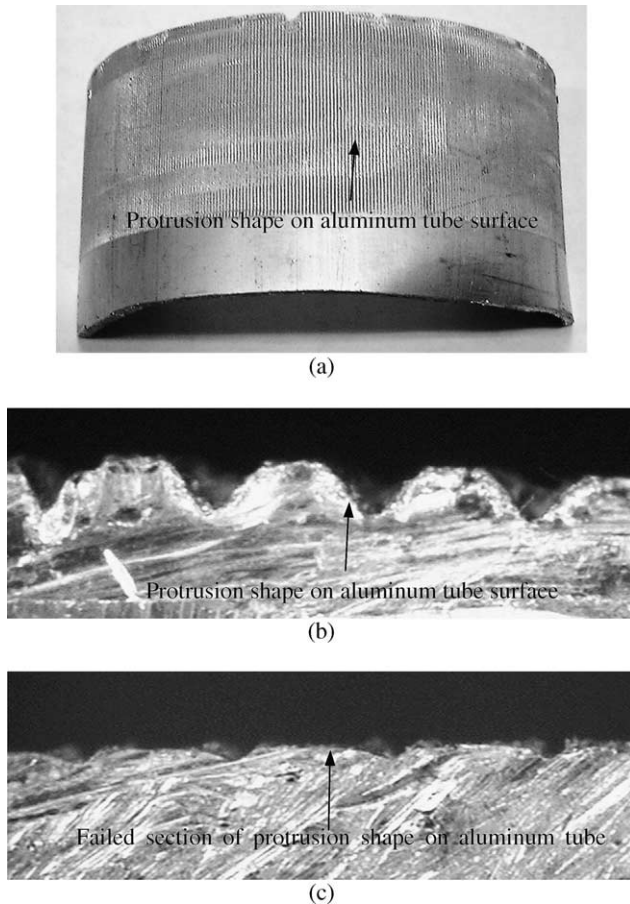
Microscopic view of surface of the aluminum tube after disassembling from the press fitted joint ($\times 100$): (a) surface of the aluminum tube; (b) section view of the aluminum tube before failure of press fitted joint; (c) section view of the aluminum tube after failure of press fitted joint.
